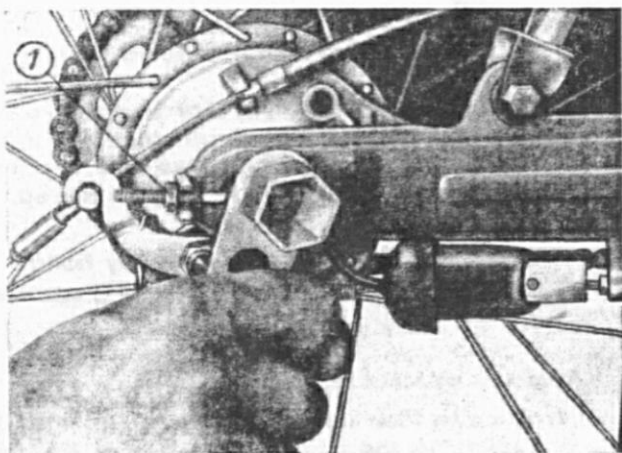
Unscrewing the stub-axle lock nut of rear wheel
